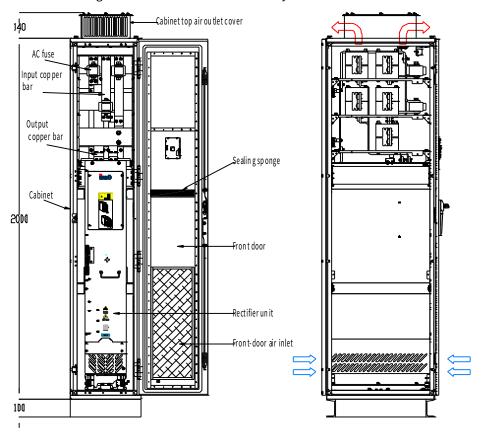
400mm-wide cabinet layout for one D8T unit
